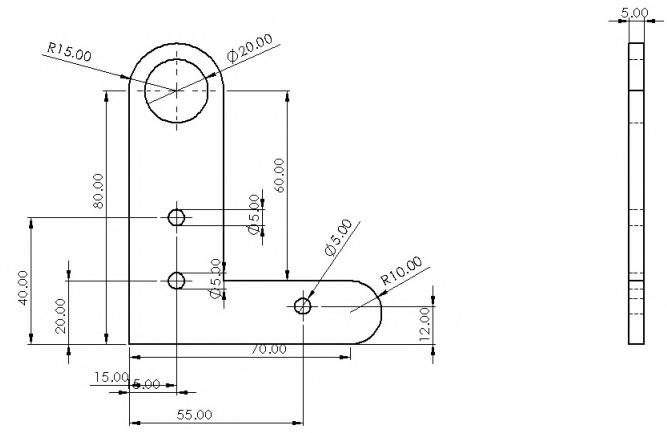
2D Drawing of the SEA holder (All dimensions are in mm)
